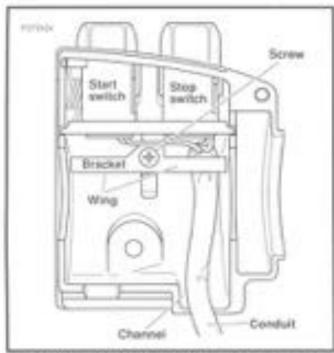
Upper Right Handlebar Switch Housing (Without Spices)
